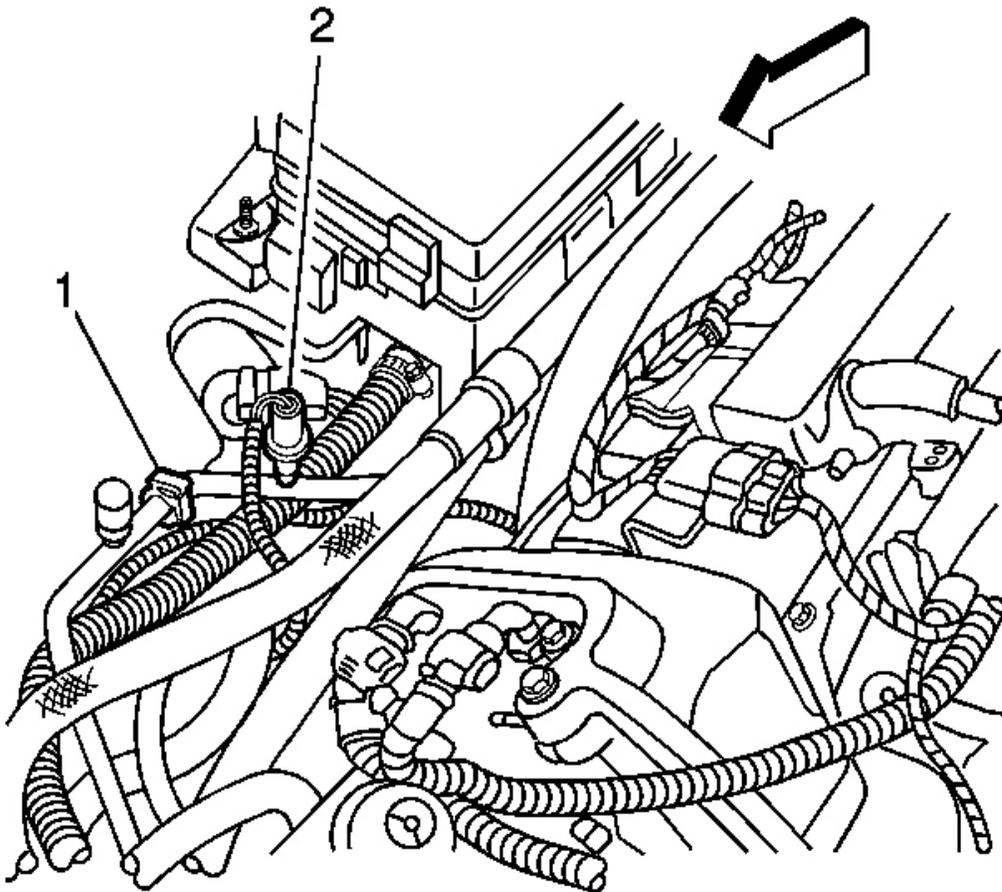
Identifying Body Retaining Clip & Refrigerant Pressure Sensor Electrical Connector
